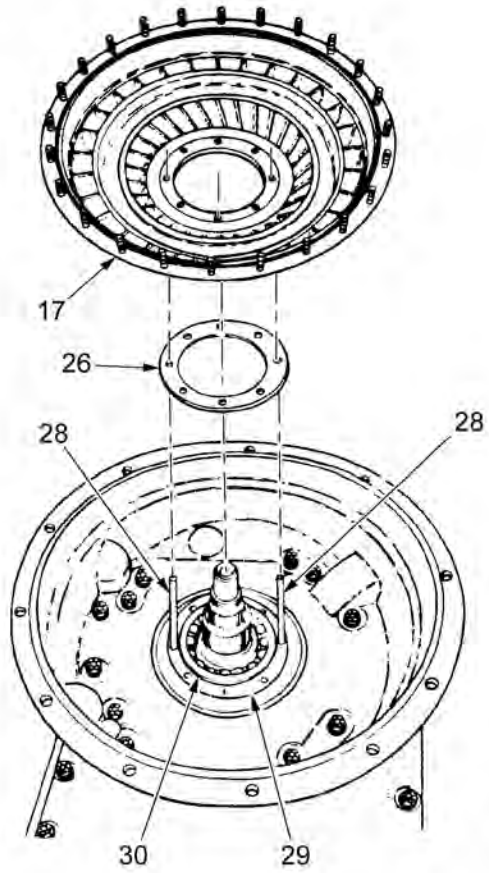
Converter Pump Gasket and Converter Pump Assembly Installation.
